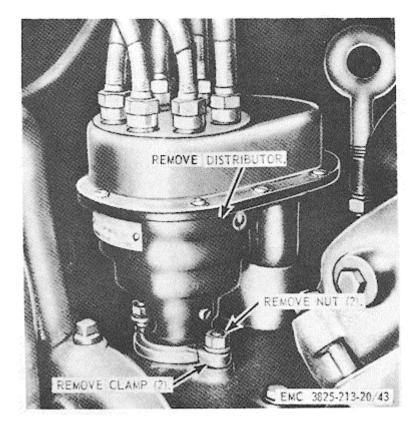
Plow and carrier engine distributor assembly, removal and installation.
